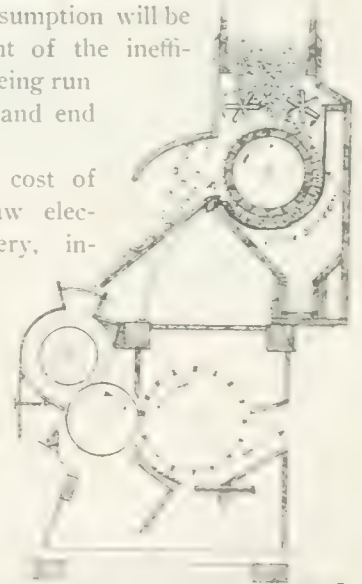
CROSS-SECTION OF ROLL BOX ON A DOUBLE ROLL HULLER GIN
